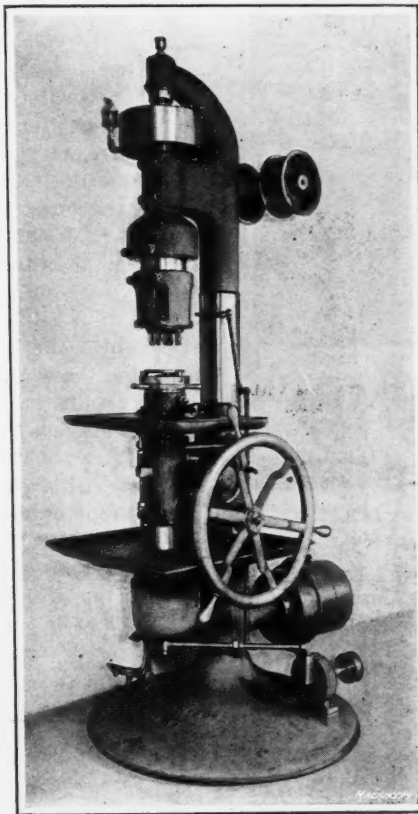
Langellier Multiple Drilling Machine with Indexing Fixture to locate Work for Six Successive Operations required to drill Eighty-four Holes, as shown in Fig. 45
